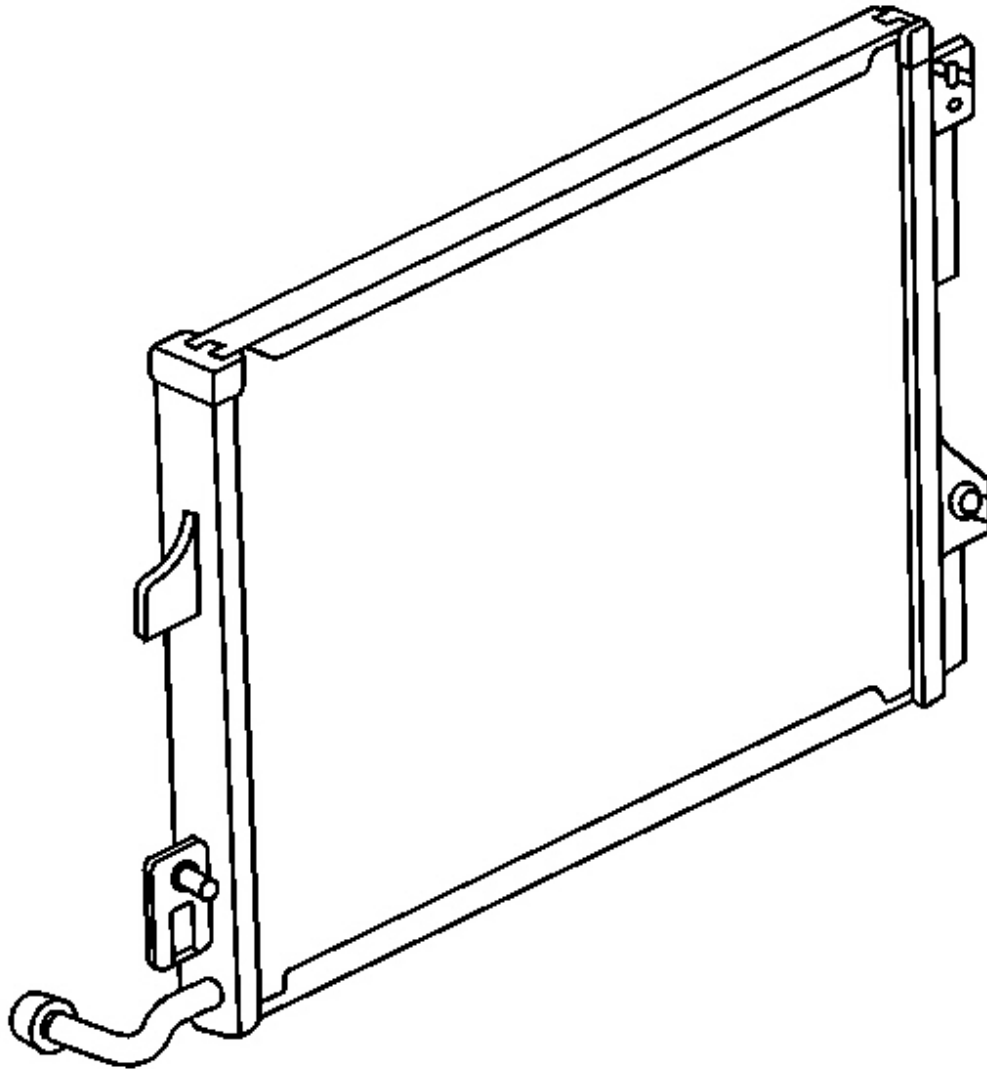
Inspecting Condenser Insulators At LH & RH Front Edges For Damage
